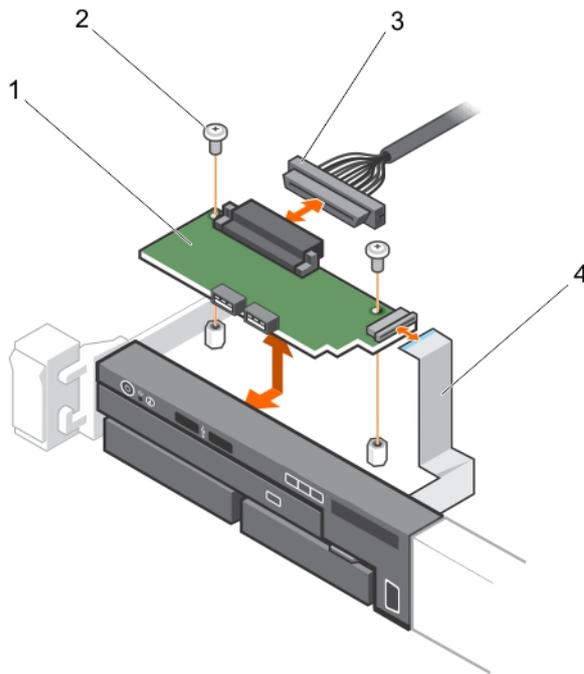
Removing and Installing the control panel module—eight hard-drive chassis
